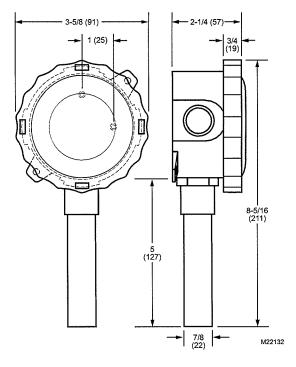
C7031G, C7021F, C7023F, C7041F dimensions in in. (mm).
